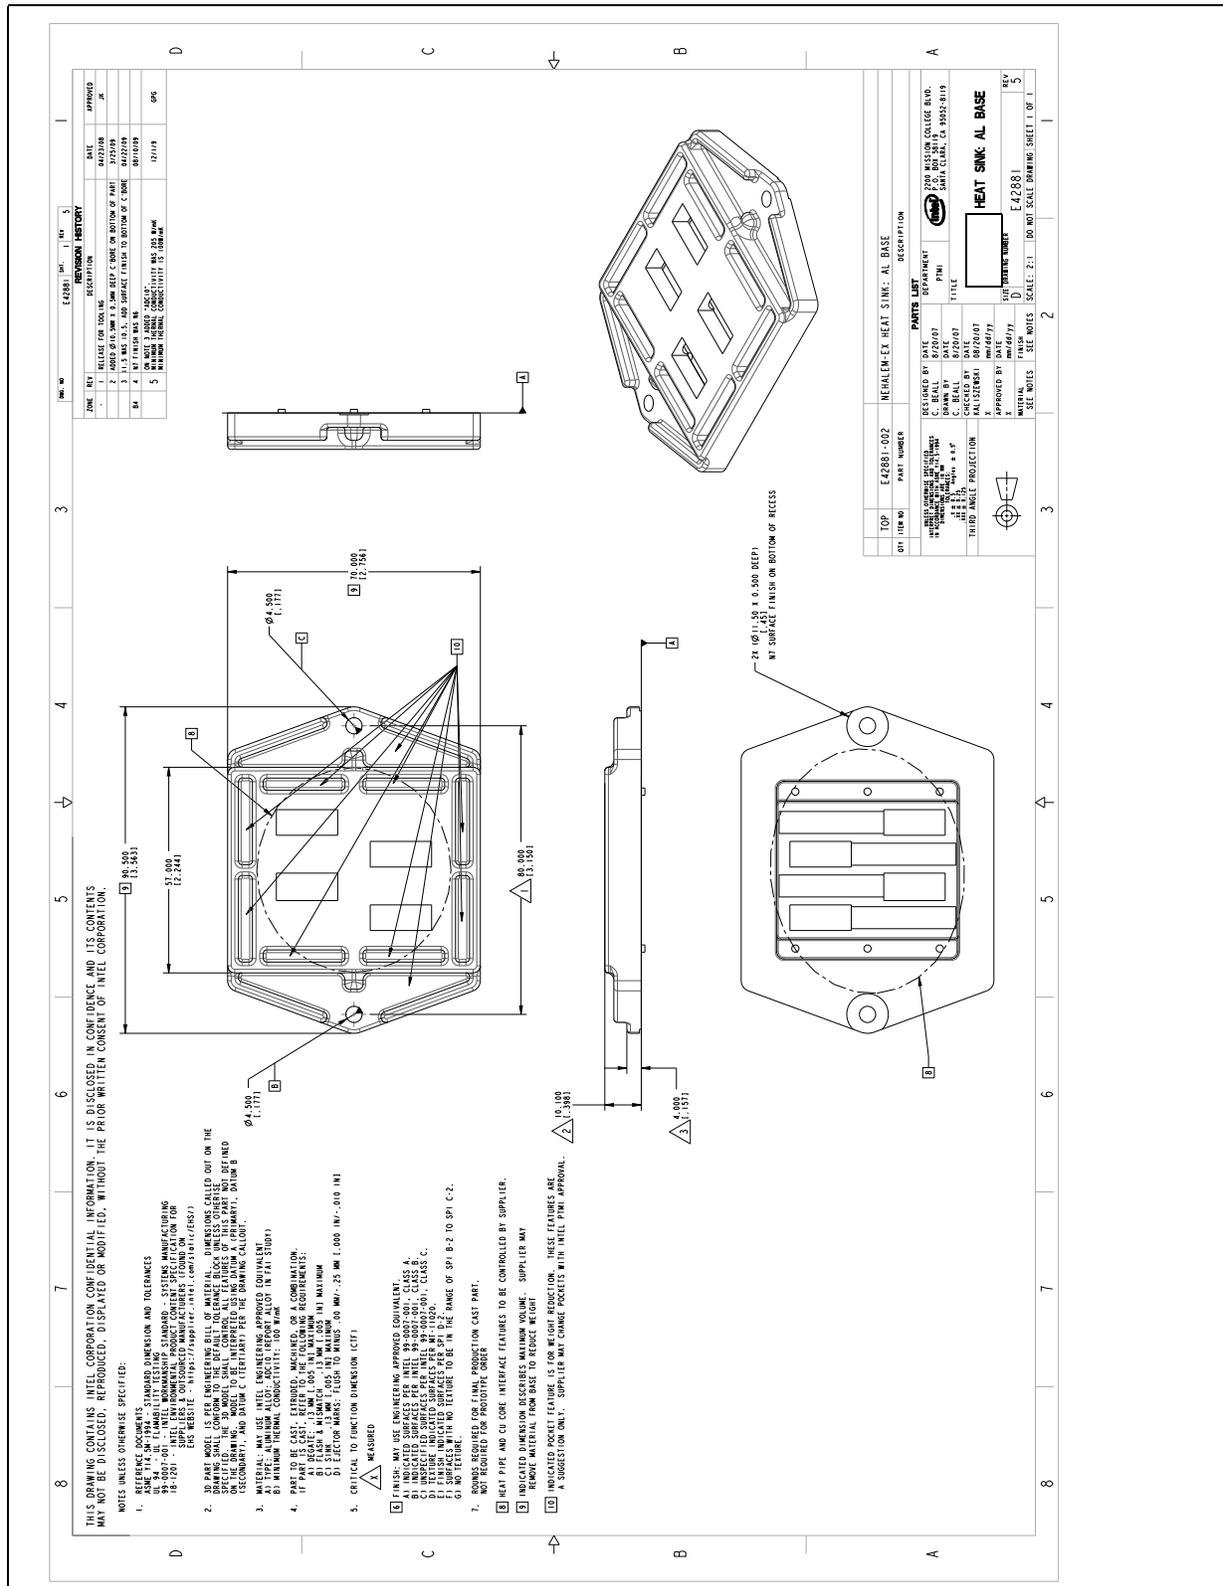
Tower Heatsink Drawing – Sheet 9 of 14
